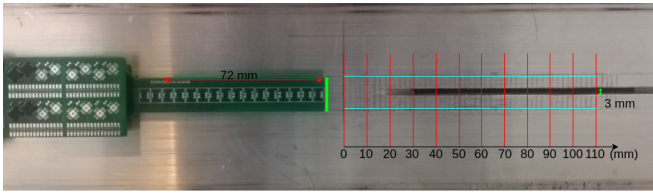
Setup used to perform the measurements with a crack in an aluminium plate.
